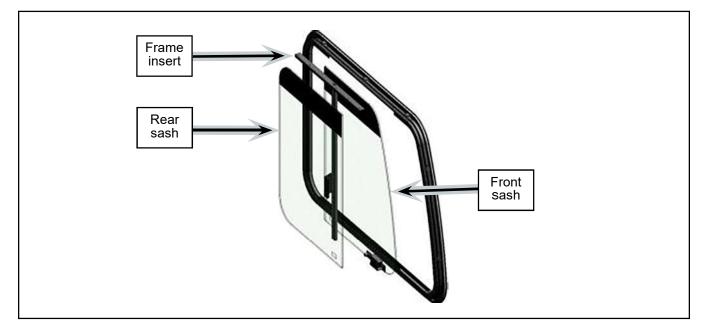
Remove Rear Sash with Frame Insert, then Front Sash
